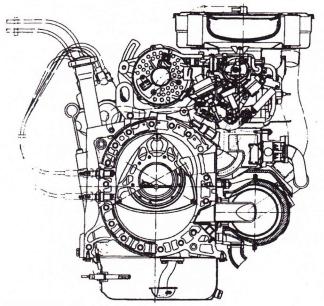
Typical rotary engine. Courtesy of Mazda
